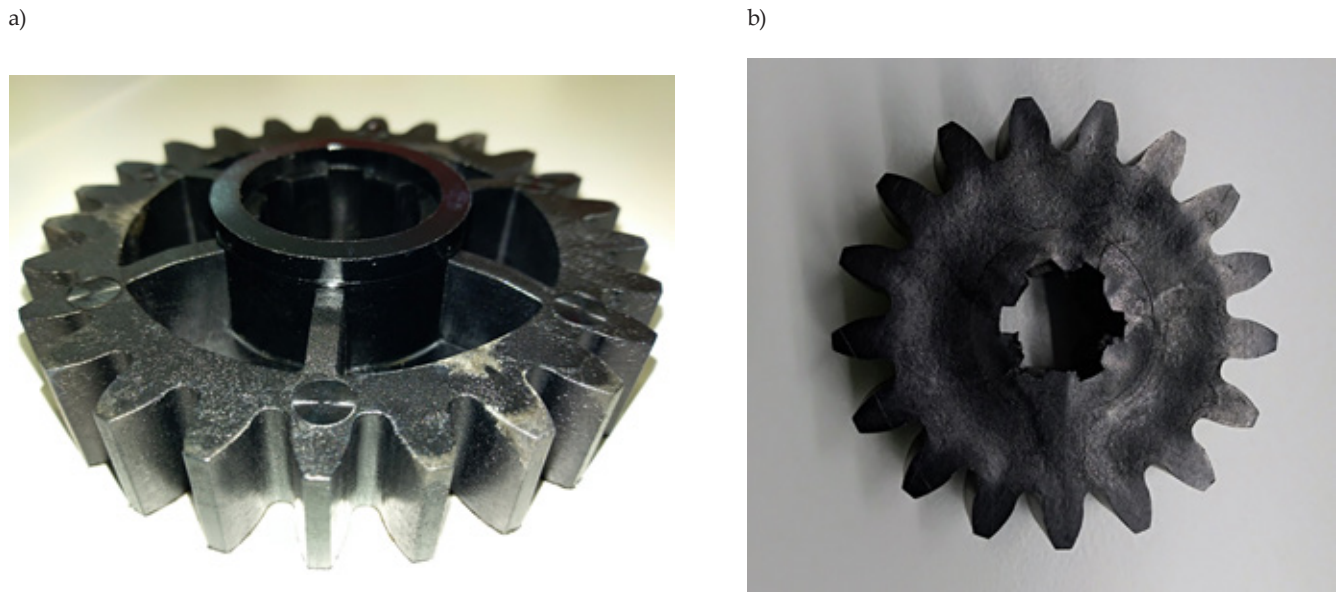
Defects of KZ25 (P6) moldings: a) burns on the connection lines and tooth tips, b) collapsed
